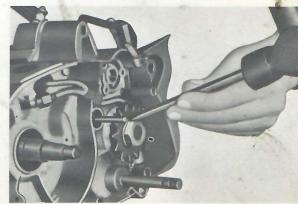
Straightening sprocket washer with chisel and hammer
